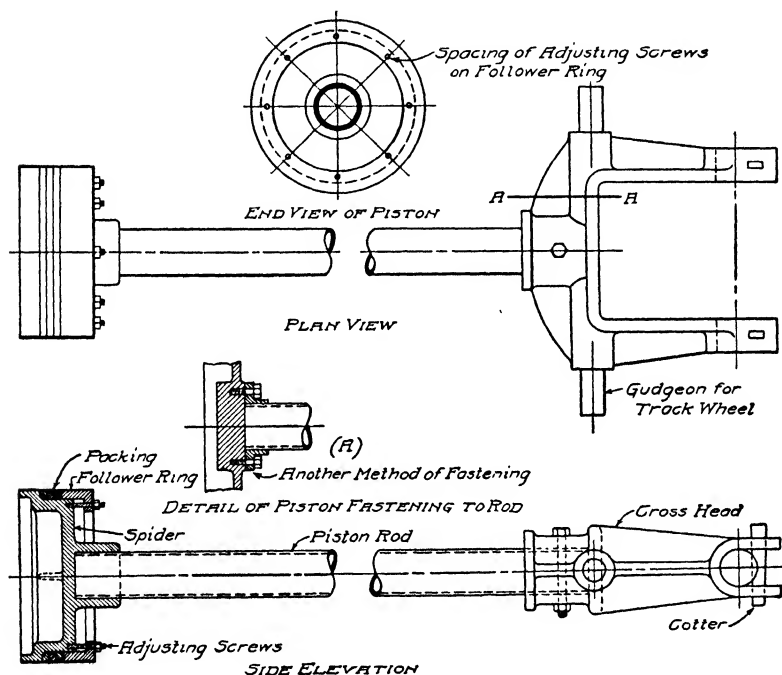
Details of Push-Machine Piston, Rod, and Crosshead
